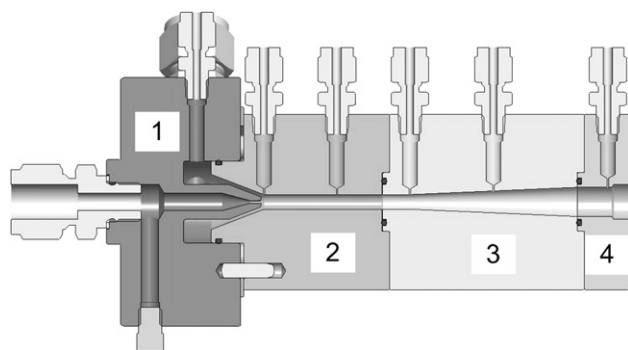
The ejector assembly. 1 – the nozzle section, 2 – the mixing section, 3 – the diffuser section, 4 – the ending section.
